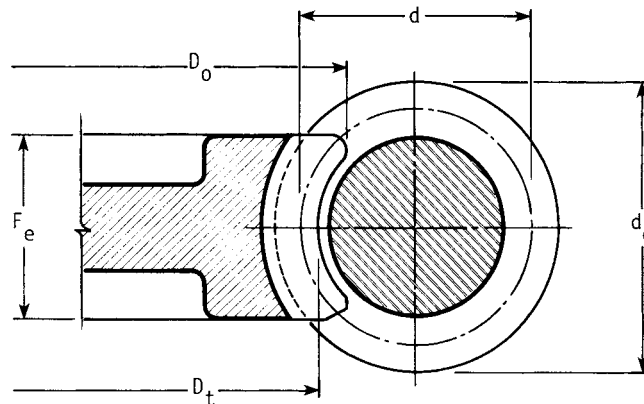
Section of worm and gear. Note that corners of gear teeth are usually rounded, as shown above the gear centerline; they may, however, be chamfered, as shown below.
